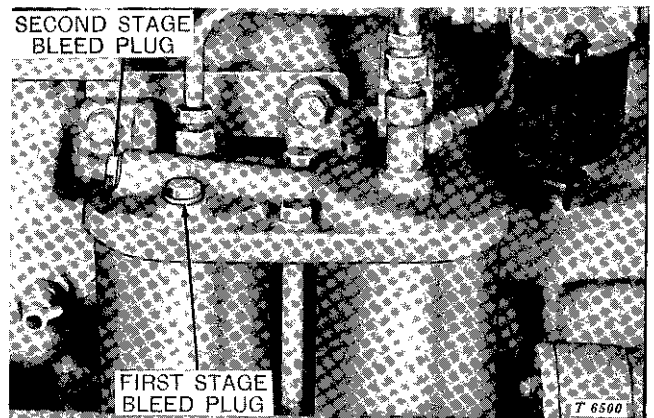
Diesel Fuel Filter Bleed Plugs (-42000)
